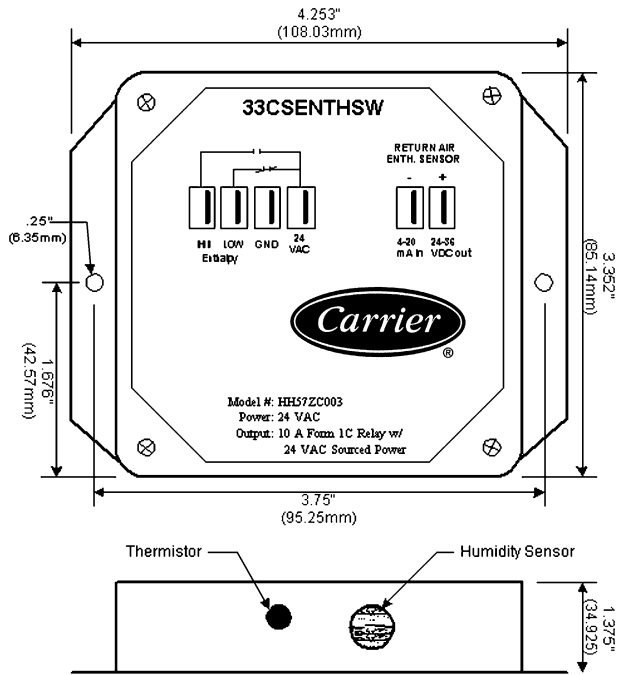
Enthalpy Switch/Receiver Dimensions (33CSENTHSW)
